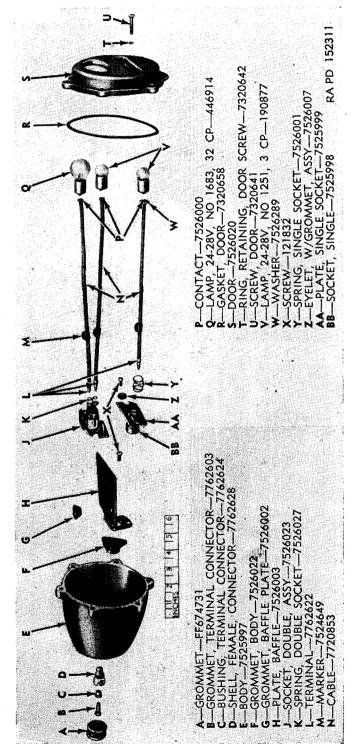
Exploded view of service tail and stop, and blackout tail light.
